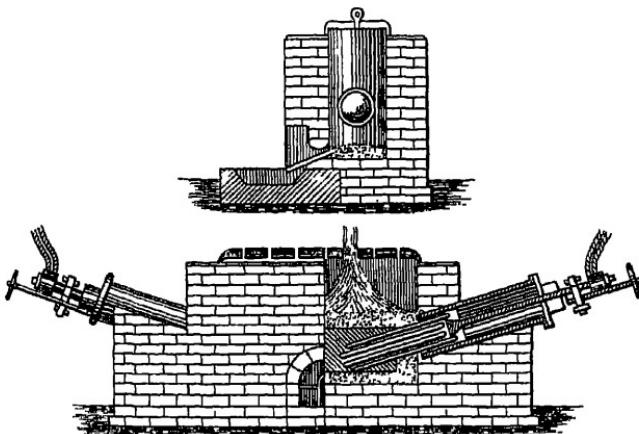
Front View of Cowles Furnace for the production of Aluminium Alloys.
